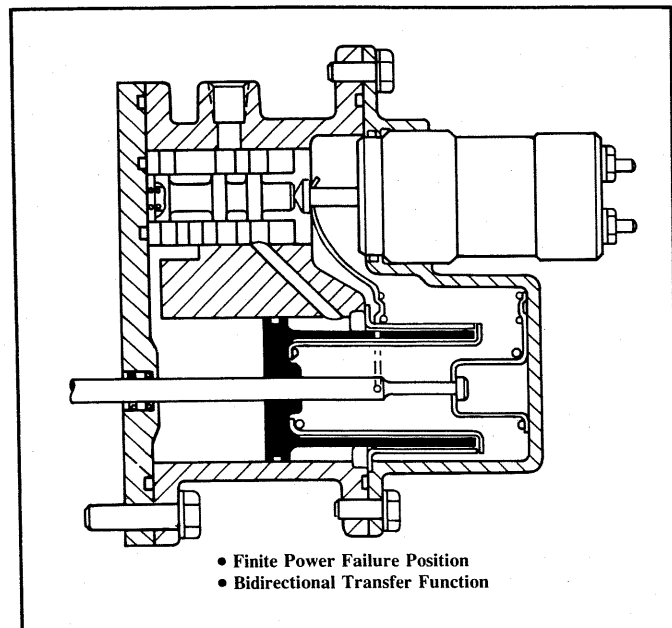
Upgraded Engine Inlet Guide Vane Actuator
